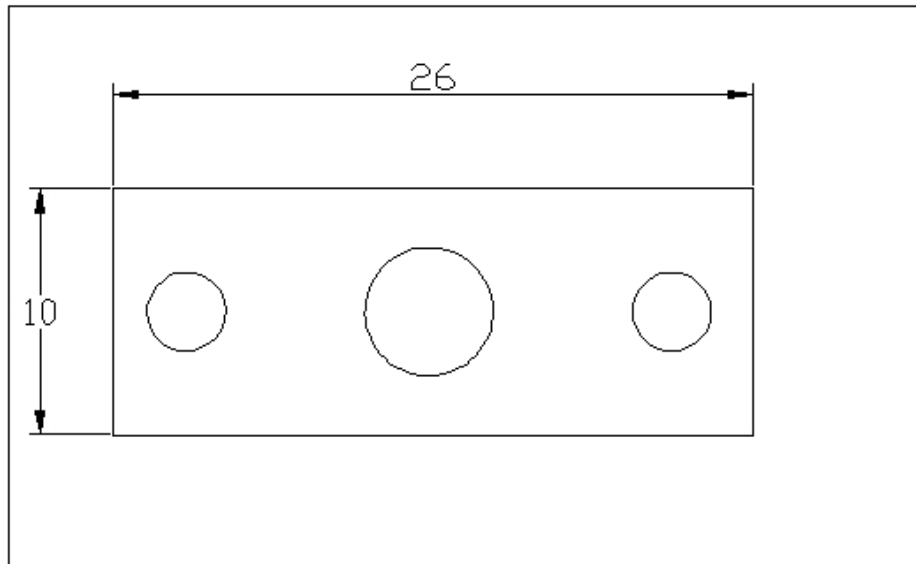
Positions and dimensions of holes in the base plate, [CD:\Drawings\Prototype\bottom\_180109.dwg]
